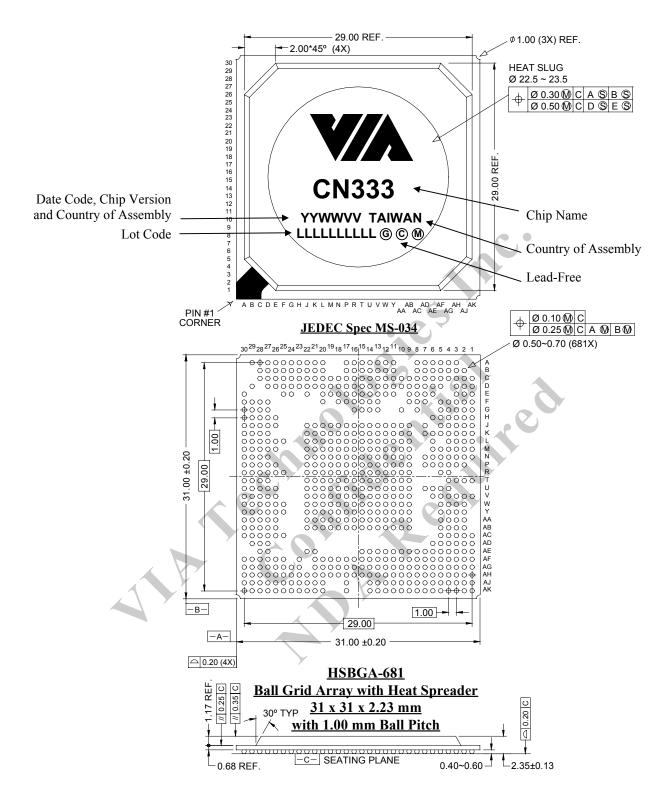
Lead-Free Mechanical Specifications - 681-Pin HSBGA Ball Grid Array Package with Heat Spreader
